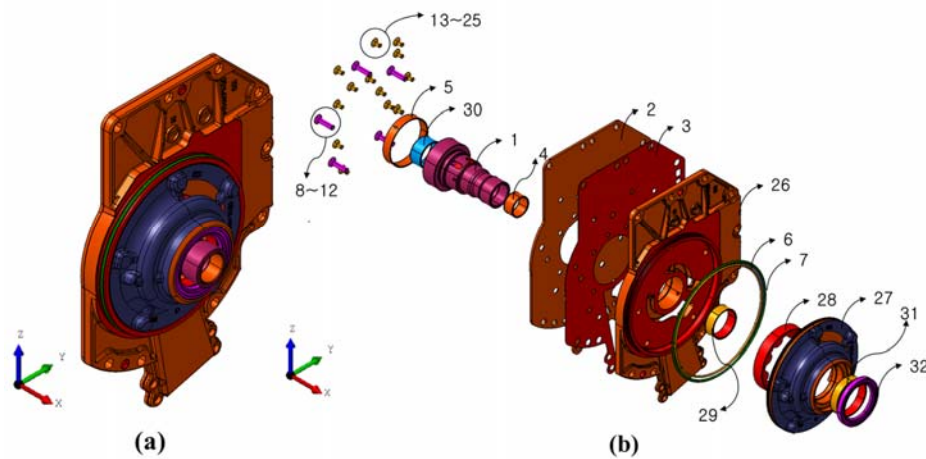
Test product (a) assembled automotive oil pump product, (b) disassembled 32 parts of automotive oil pump product
